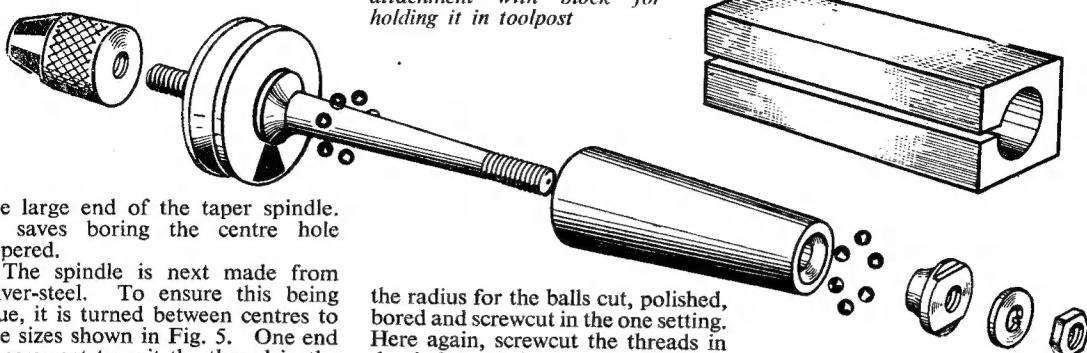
Exploded view of attachment with block for holding it in toolpost
